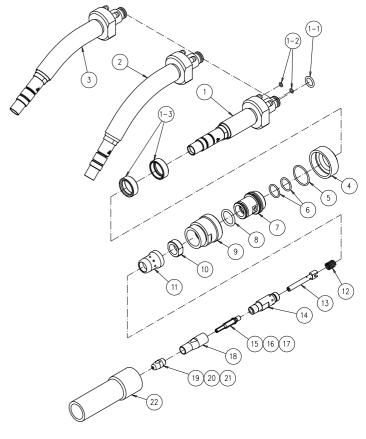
Exploded diagram for RZW5000S, RZW5000H, RZW5000L
